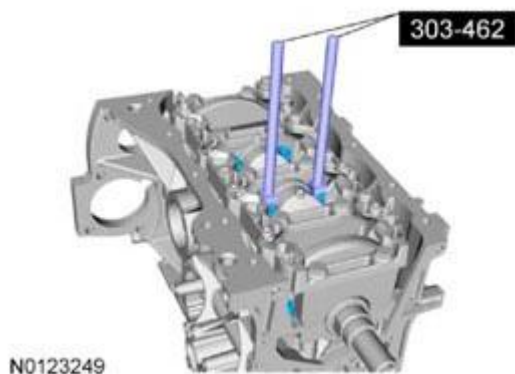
Removing Piston/Rod Assembly From Engine Block
